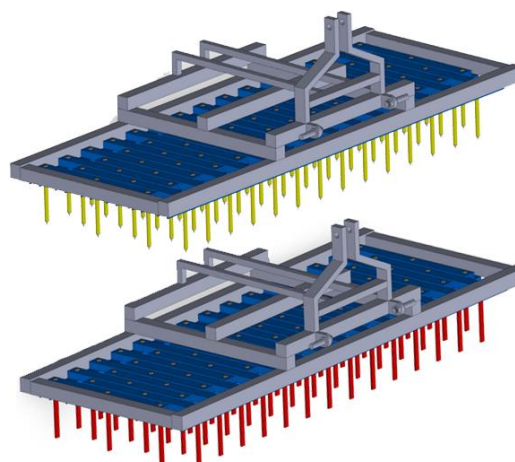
Represents my three-dimensional view combing machinery with circular tooth and with the rectangular
